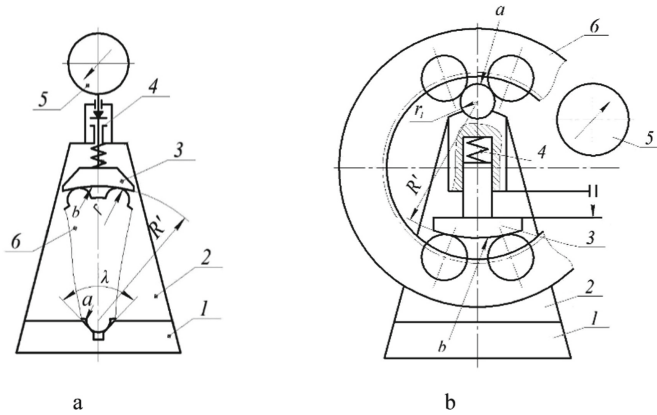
Measuring devices for monitoring the shape error of the inner (a) and outer (b) rotors of an orbital hydraulic motor: 1 – table; 2 – rack; 3 – measuring tip; 4 – spring; 5 – indicator; 6 – controlled rotor.
